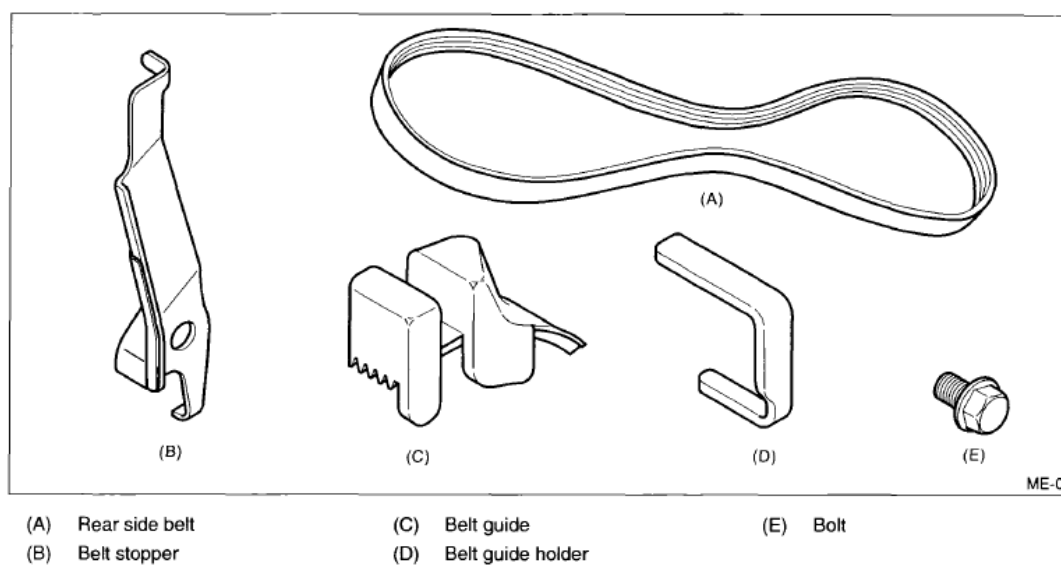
Identifying Rear Side Belt, Belt Guide, Belt Stopper, Belt Guide Holder And Bolt
